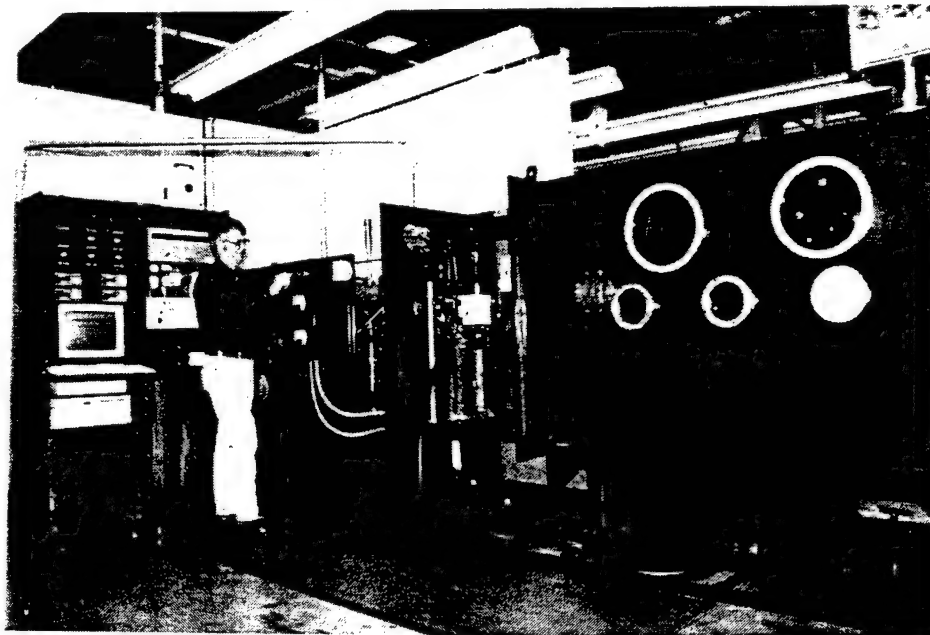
Overall View of Spray Casting Equipment During Boeing and Wright Laboratory Test Series.
